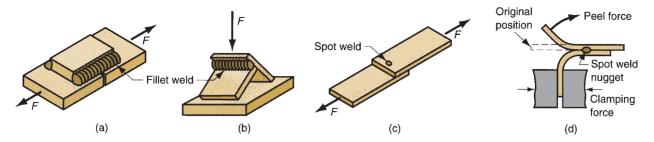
Mechanical tests used in welding: (a) tension—shear test of arc weldment, (b) fillet break test, (c) tension—shear test of spot weld, (d) peel test for spot weld.
